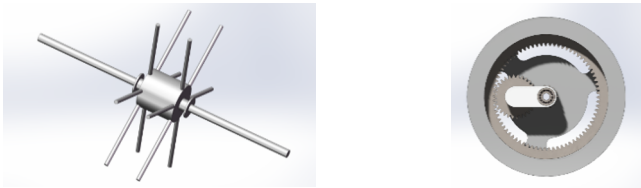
Ball Rollers and Combination of dual wheels and planetary gears
